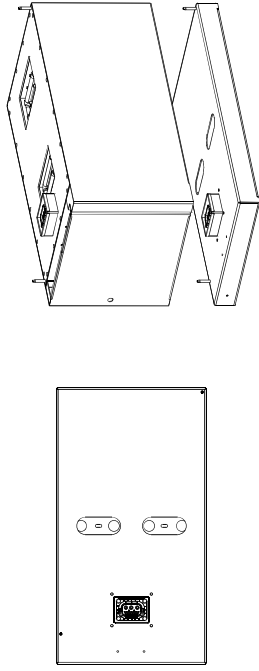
(2) Connection of the battery box and the bottom cover assembly
